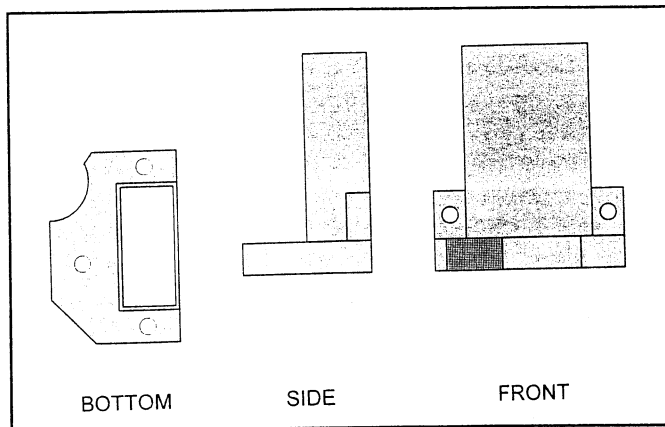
Half flange assembly for coupling adjacent waveguide sections.
